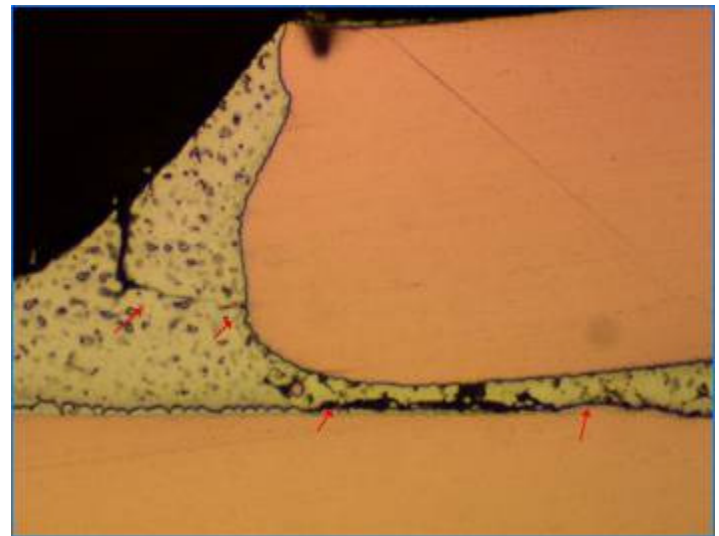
cross section, SN62, U31, left lead solder crack, 400x, c
